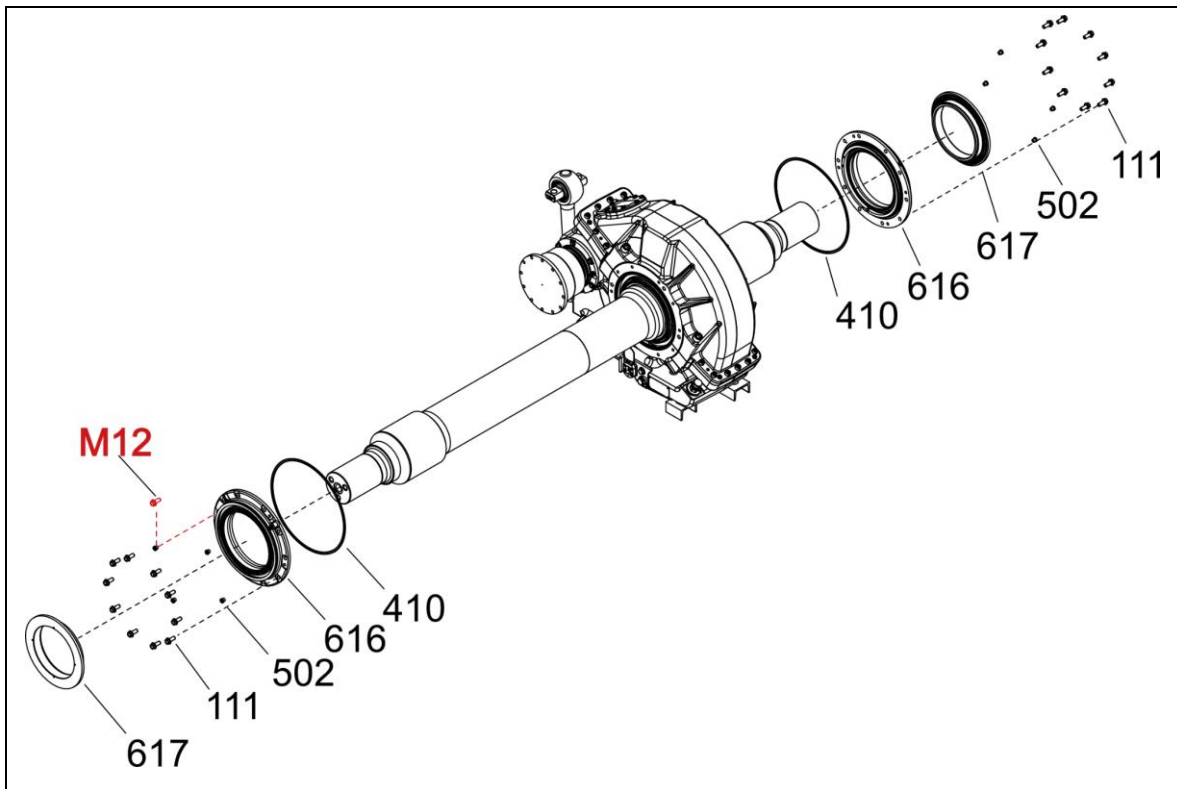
Demounting the wheelset shaft from the Traction Gearbox – part 1
